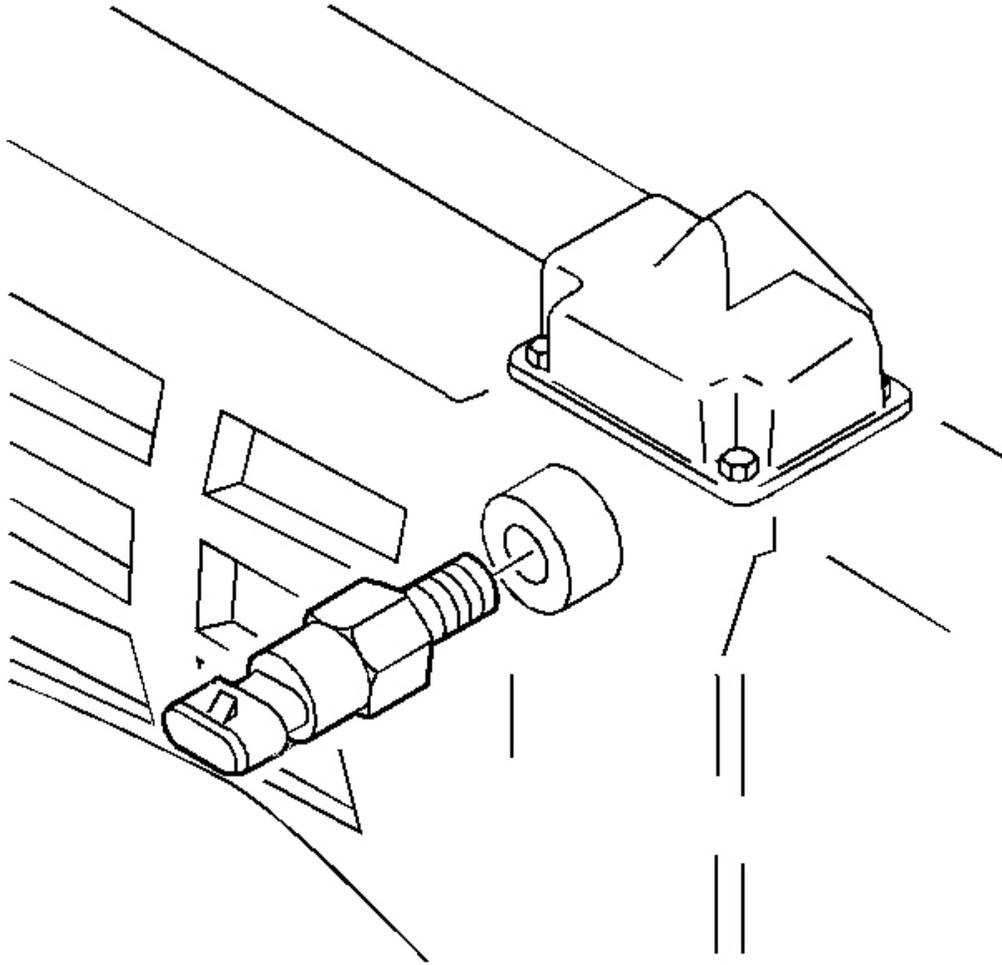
Identifying Computer Aided Gear Select Solenoid
